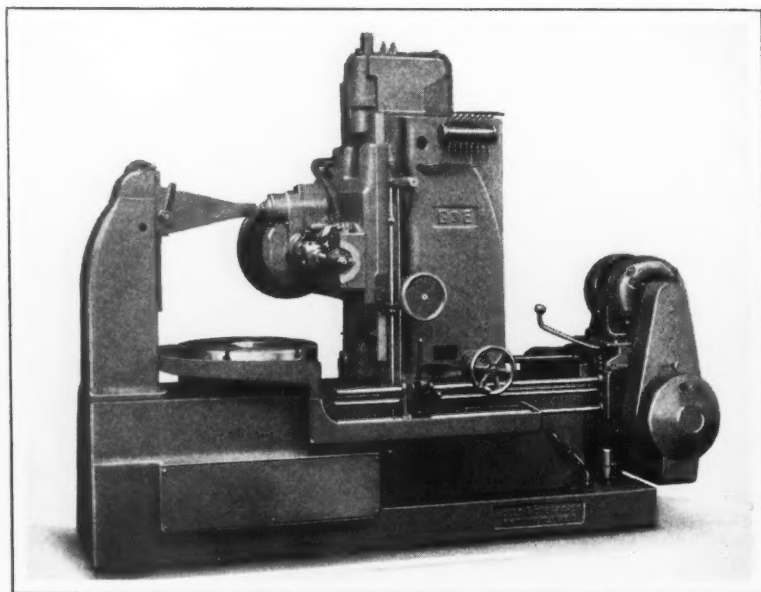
Gould & Eberhardt Manufacturing-type Gear-hobbing Machine for Cutting Gears up to 57 Inches in Diameter
